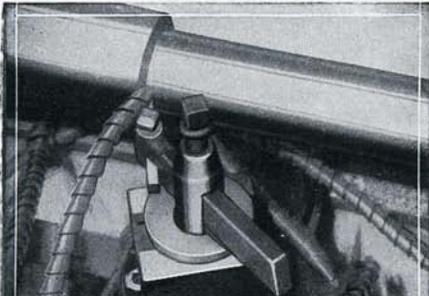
Reducing the Diameter of a Shaft from 2 Inches to $1\frac{1}{2}$ Inches in One Cut
